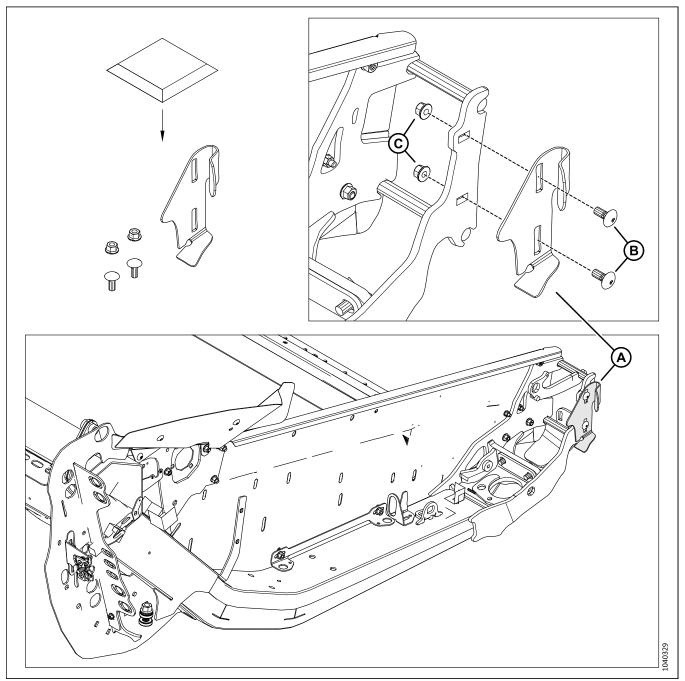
Front Support Installation, Parts Bag MD #357468
